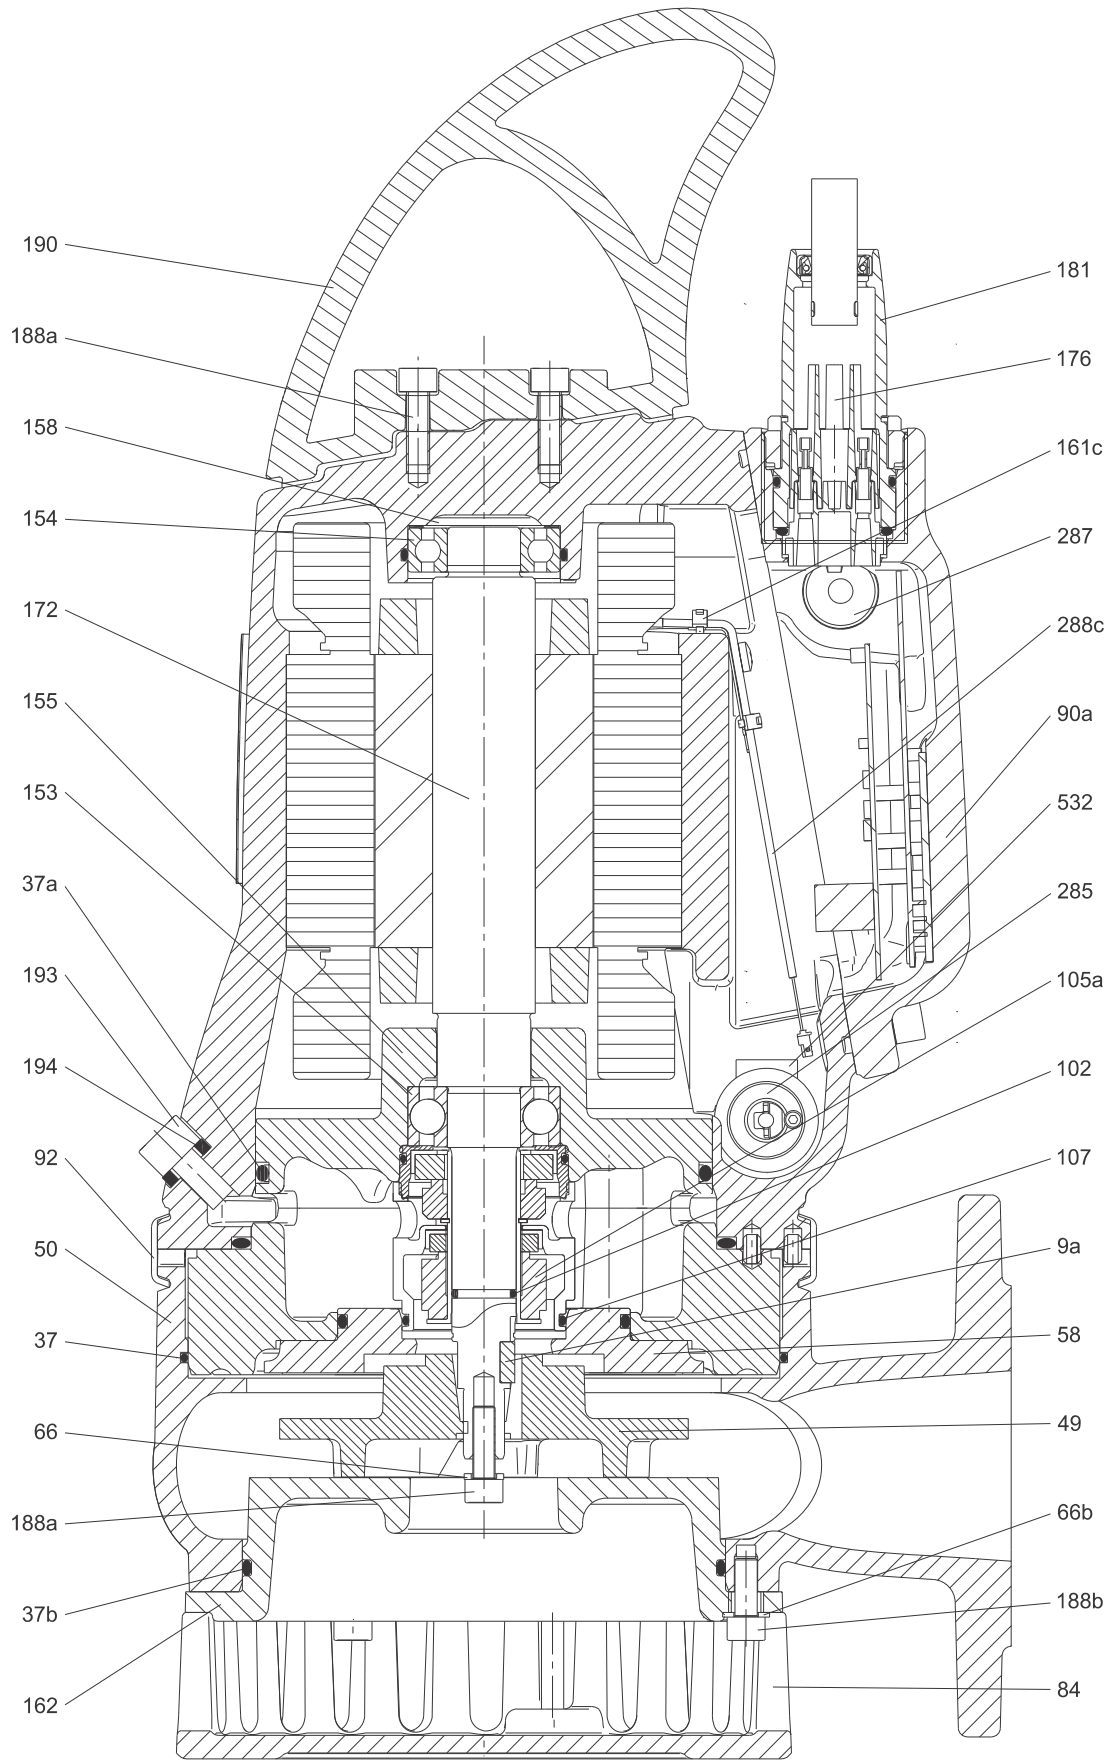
Exploded view, DP10.50.09/15 AUTO_{ADAPT}
